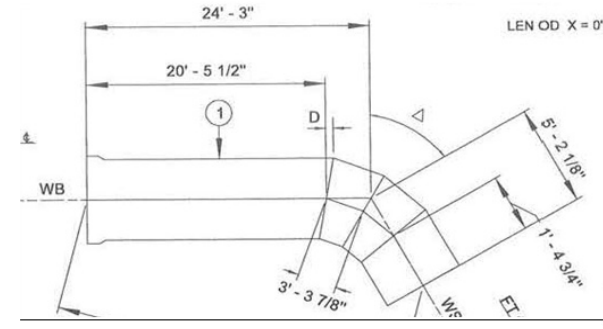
Steel pipe segment for 60 degree bend from American Spiral Weld Pipe Company.
